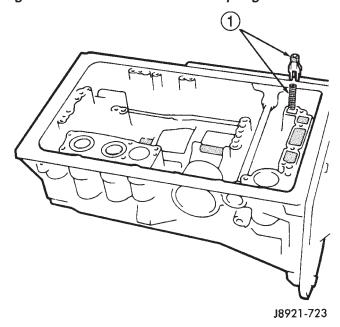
Installing Check Ball Body And Spring 1 - CHECK BALL BODY AND SPRING
